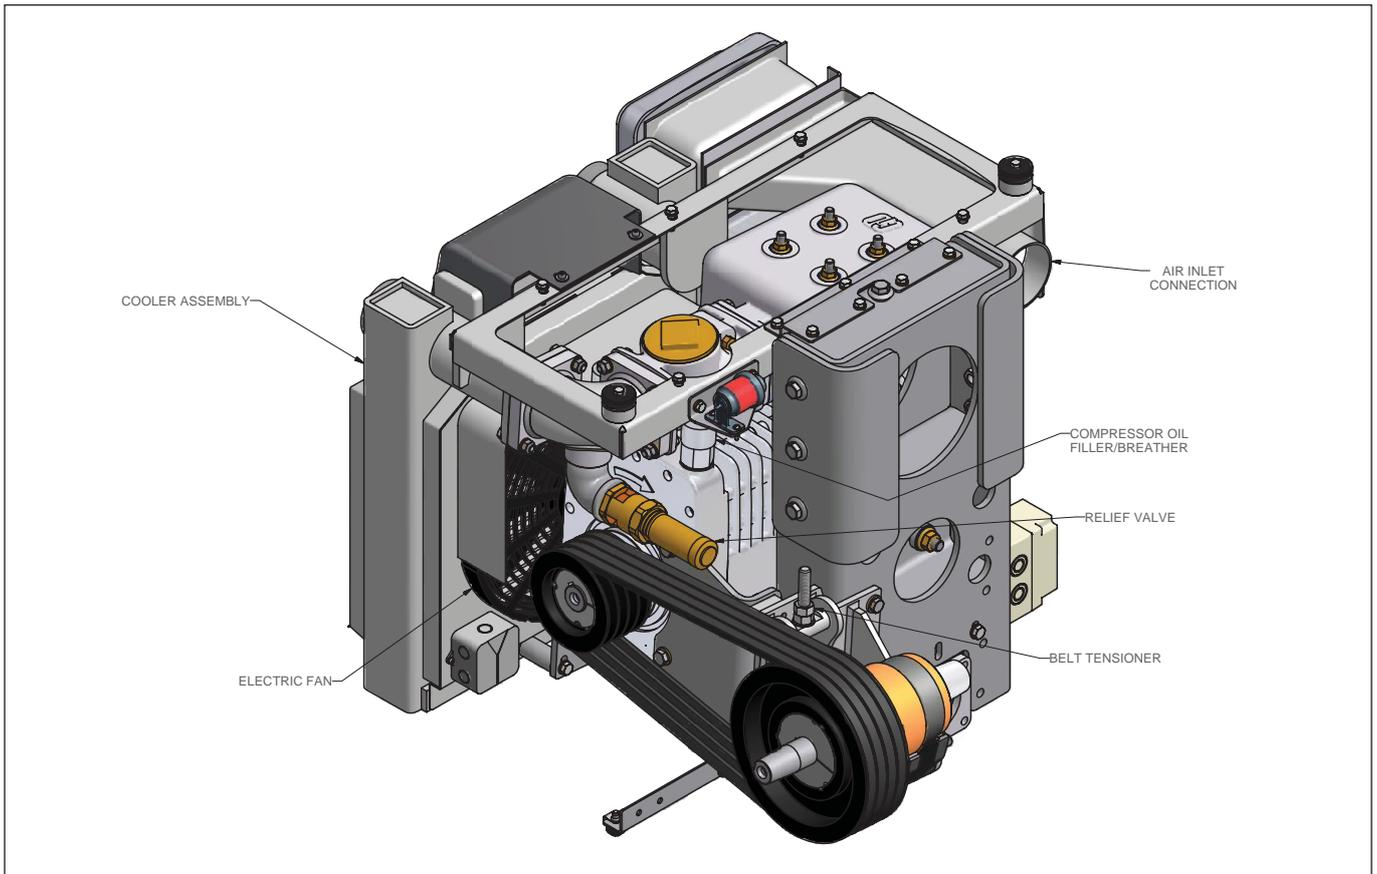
Components Rear Isometric View with Enclosure Removed Clockwise (Right Hand) Rotation
